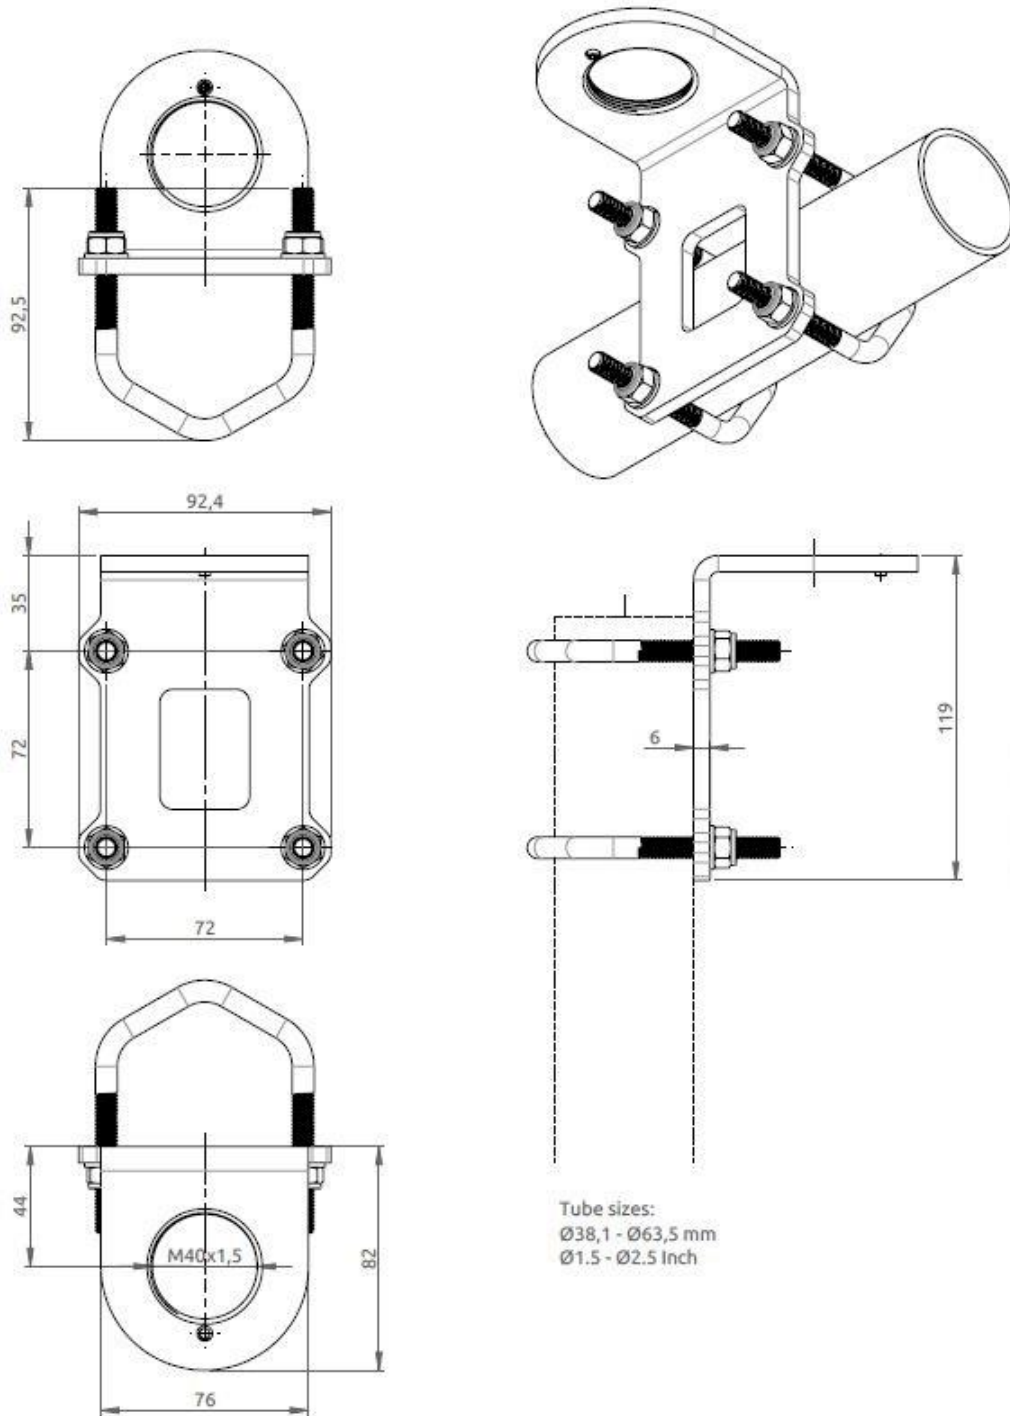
Outline Drawing: Bracket Mount (1.5" to 2.5" tube), Antenna Unit
